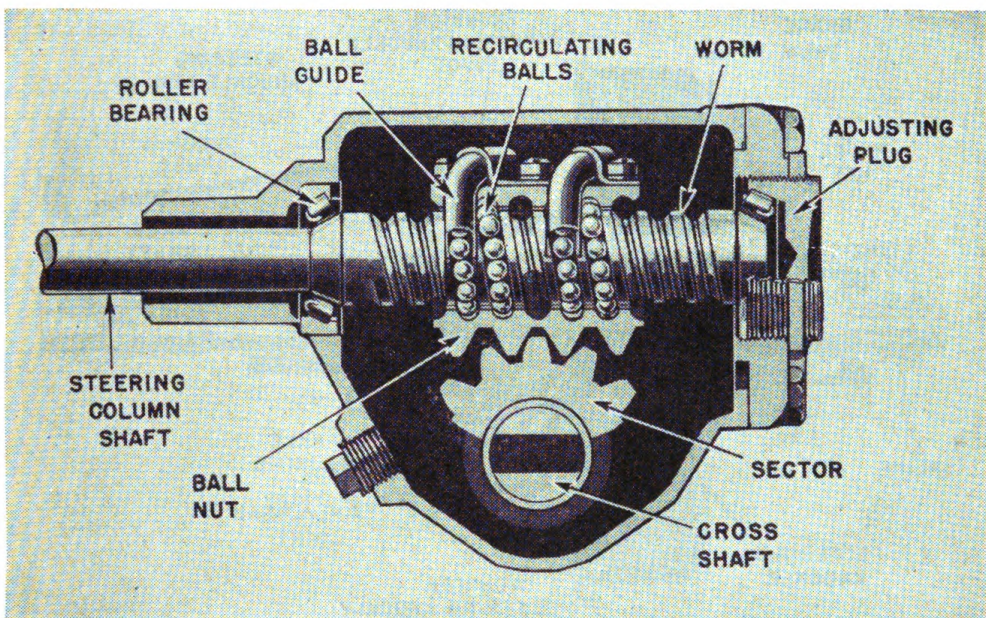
Worm and nut steering gear (recirculating ball type).
